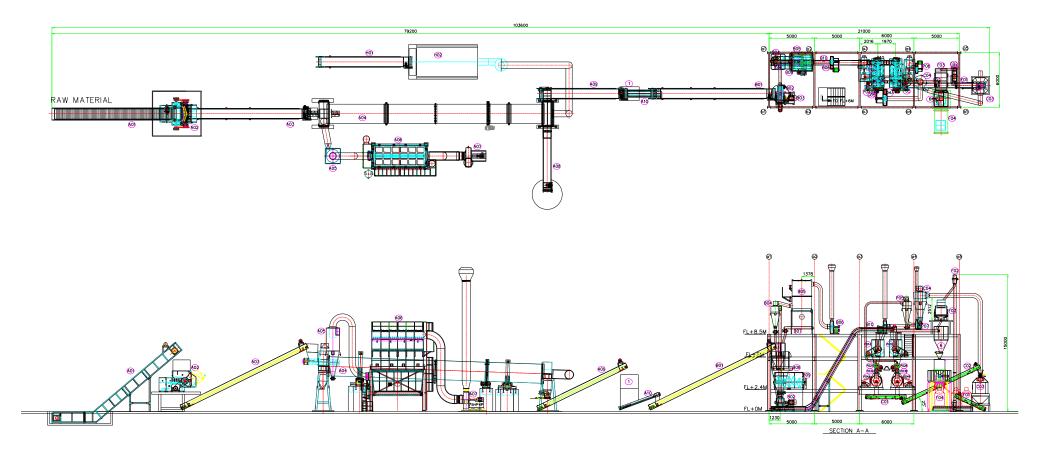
Layout and side view of a bio-pellet manufacturing plant
